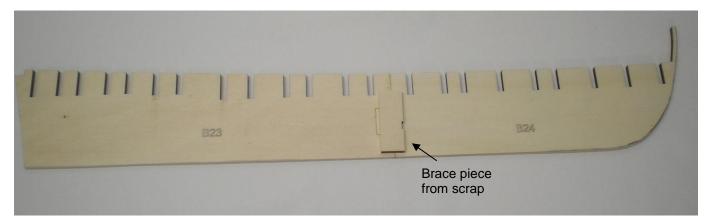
Note: Brace piece spanning joint. Lower deck openings not cut yet.
